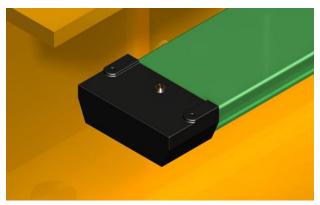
The buss bar end cover should bottom out. Be sure to secure the cap with the screw to keep the collector from sliding out the end of the track and/or getting damage.
